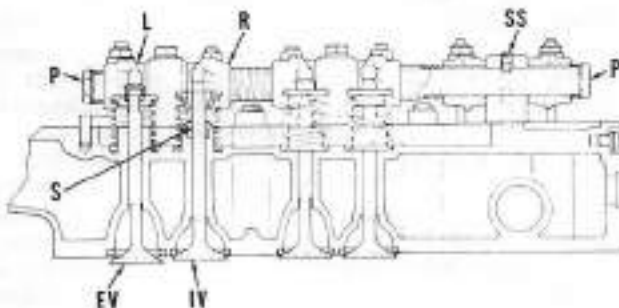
Cut-away view showing rocker arm and valve installation in 3-cylinder engine; four-cylinder engines are of basically similar construction.
